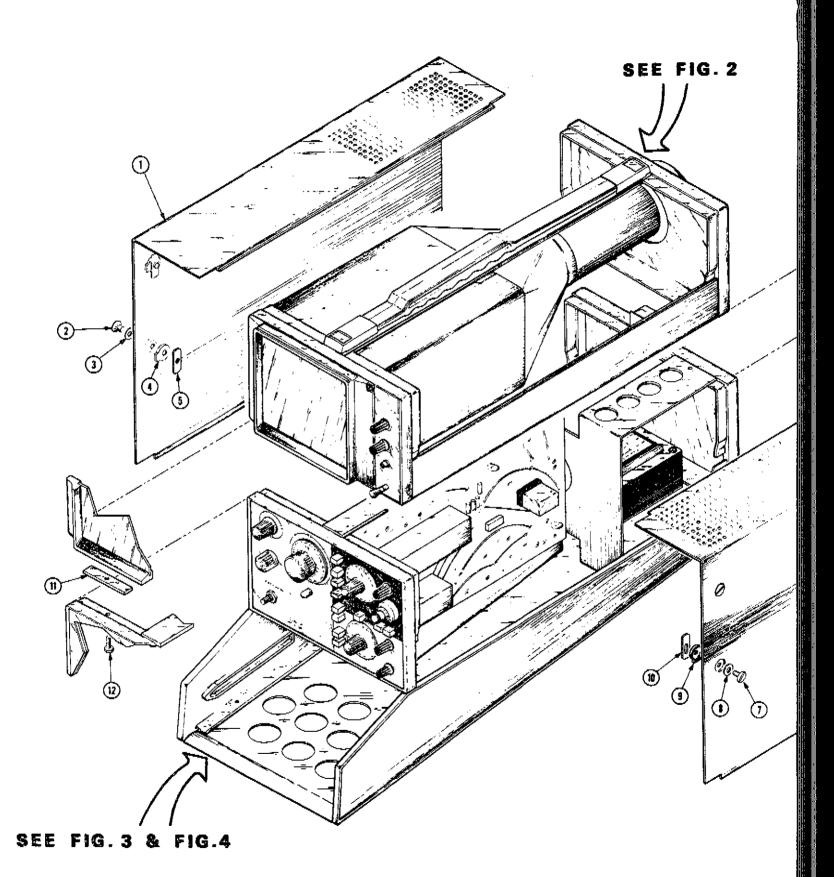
UNIT ASSEMBLY Sht. 20F2
